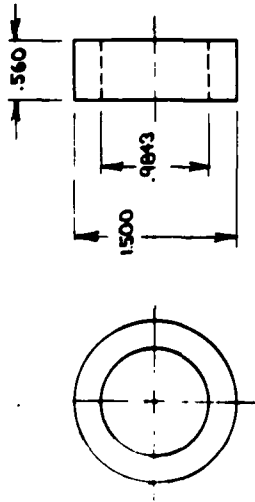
Bearing Block Mounting Bracket - El Axis.
